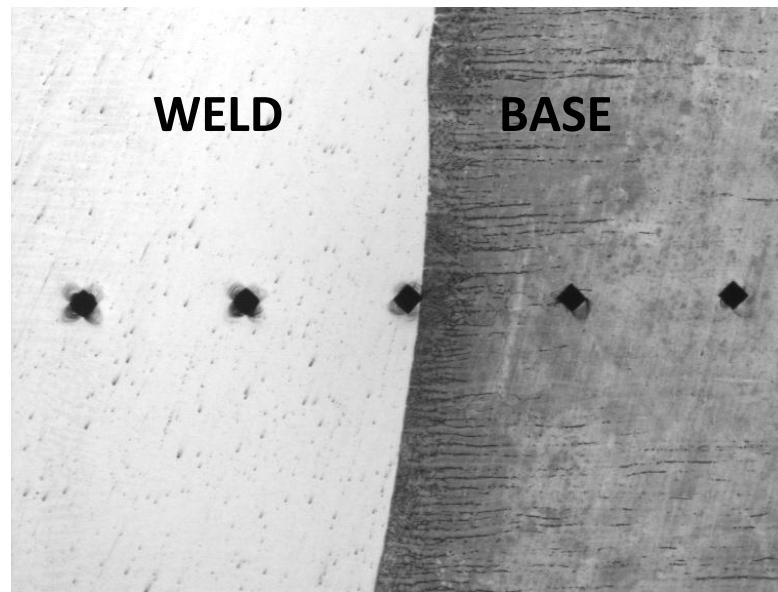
IMAGE OF WELD CROSSECTION
